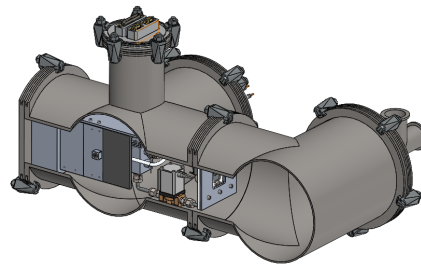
3D CAD drawing: Vacuum Chamber Cross Section.
